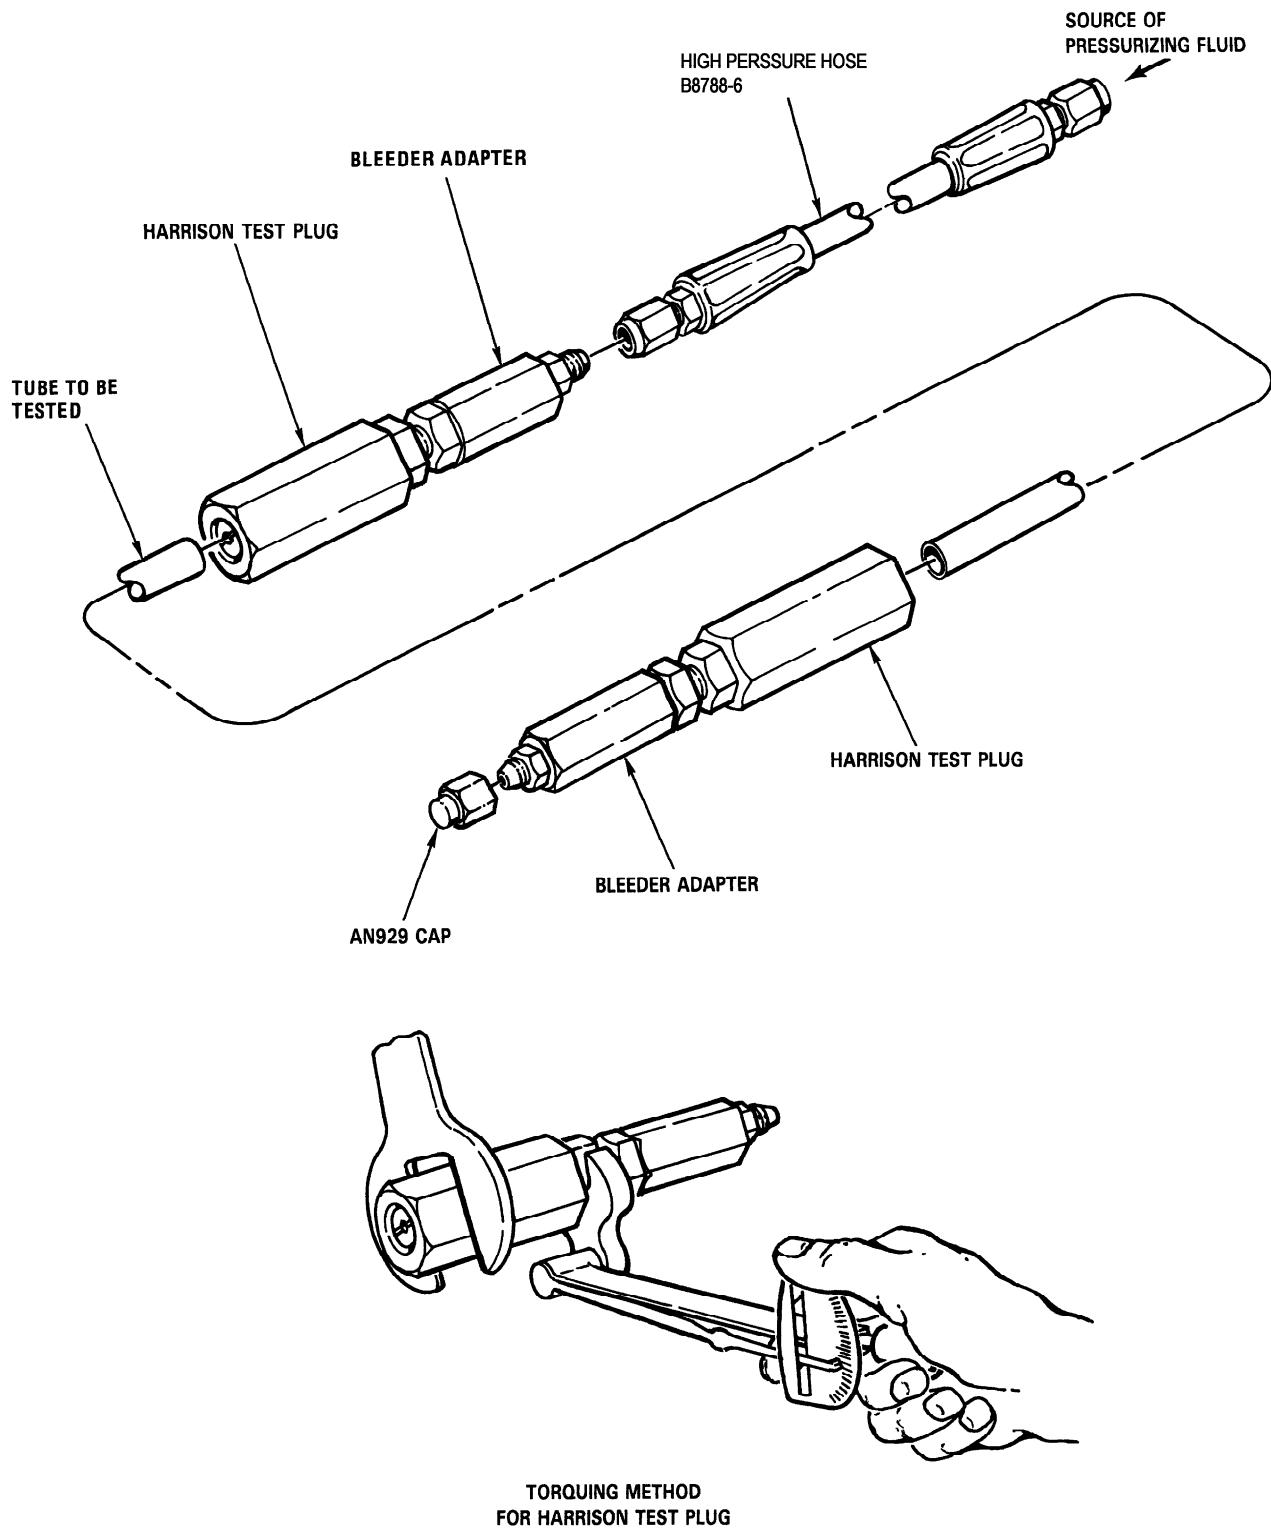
Pressure Testing Permaswage Assemblies (Sheet 1 of 2)
